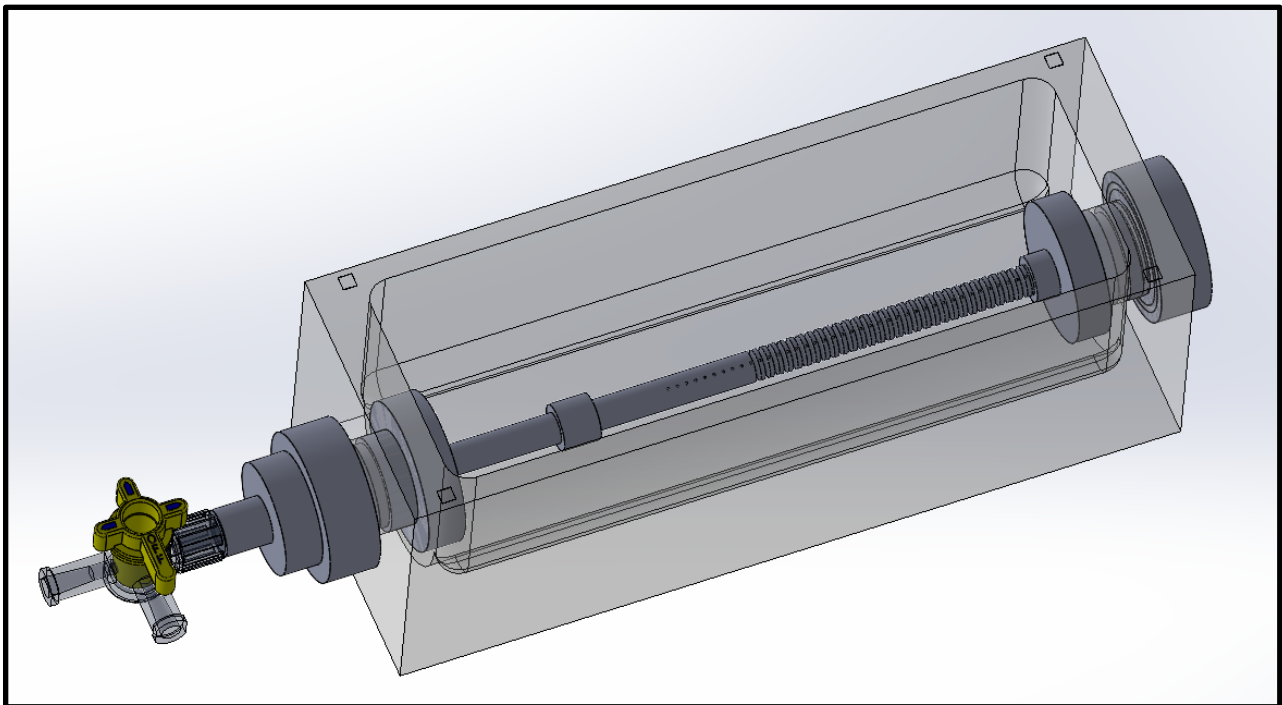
Assembly of the bioreactor with the components listed until now: perfusion inlet, assembly inlet, inner perfusion axis, three-way stopcock. Note the addition of smaller components to improve feasibility of 3D printing.
